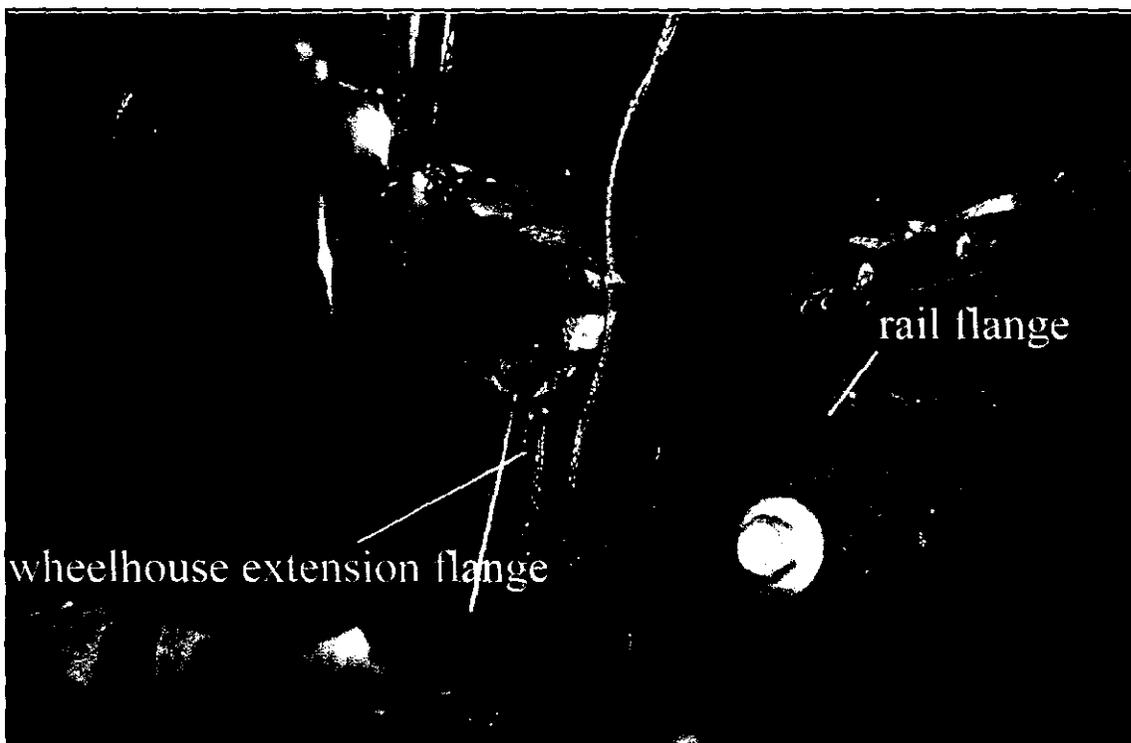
Filler Tube Loading from Wheelhouse Extension (CX0305).
